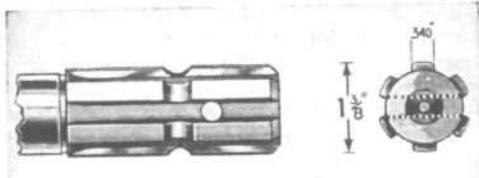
POWER TAKE-OFF SPLINED SHAFT
